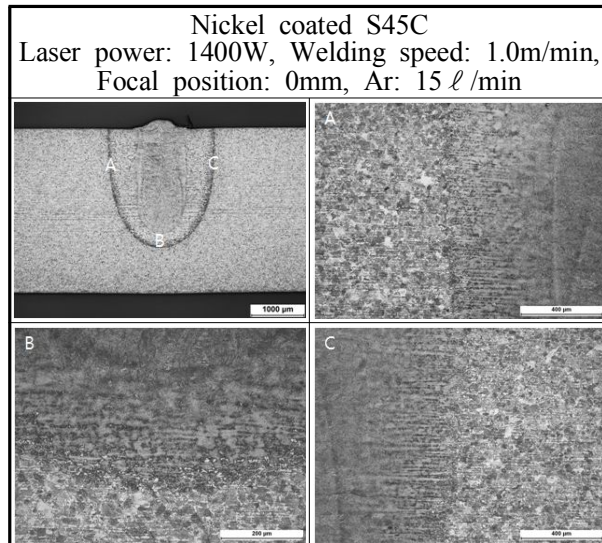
Photographs of melting zone after BOP welding(Nickel Coated S45C)
